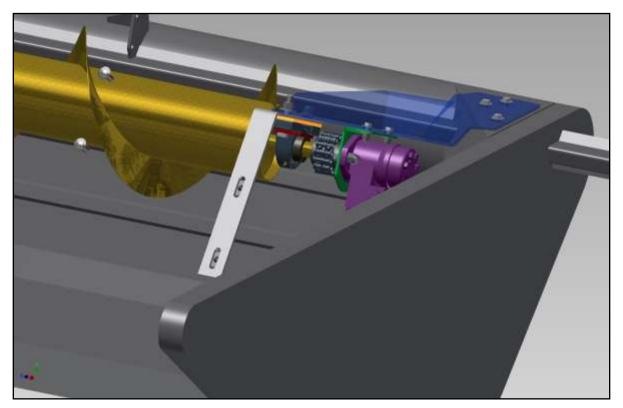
ASSEMBLY VIEW MOTOR END MOUNT
